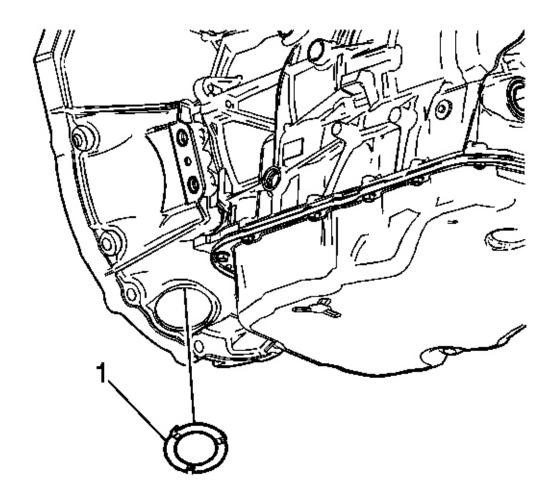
Identifying Torque Converter Bolts Courtesy of GENERAL MOTORS CORP.
